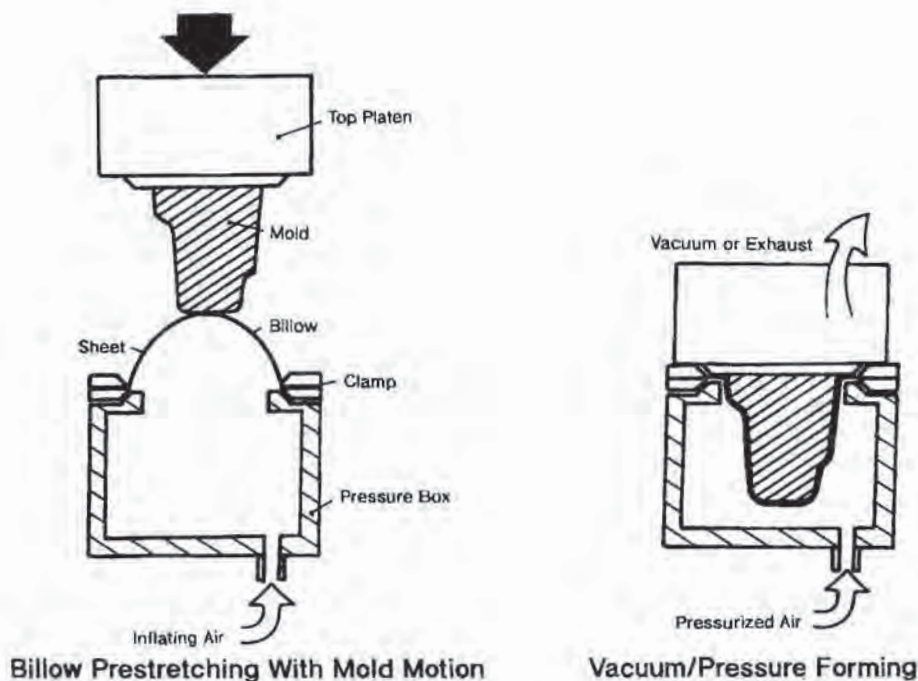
Billow drape forming, with either vacuum or applied air pressure shaping the sheet against the mold surface
